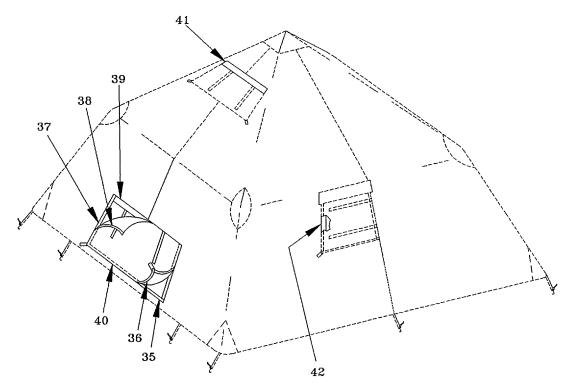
FLY ASSEMBLY (Sheet 2 of 2)
